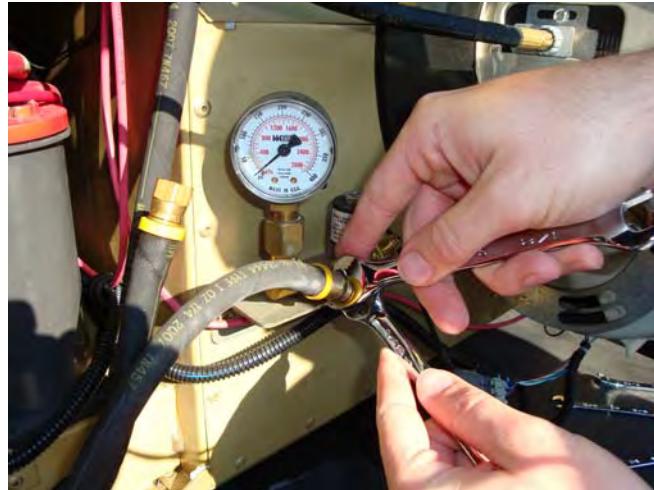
Remove Burner Fuel Pump Fuel Hose Connected to Elbow and Tee.
